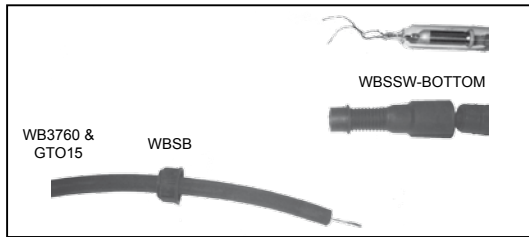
Slide the wetbits sealing bushing WBSB over the sleeving and cable
